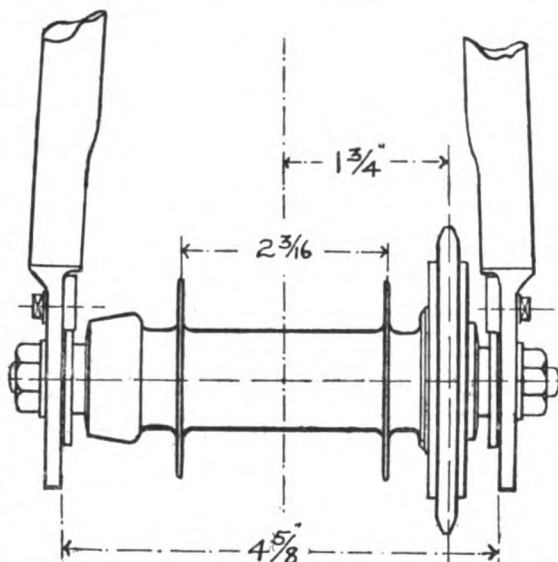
TOP VIEW OF DRIVING WHEEL HUB.
